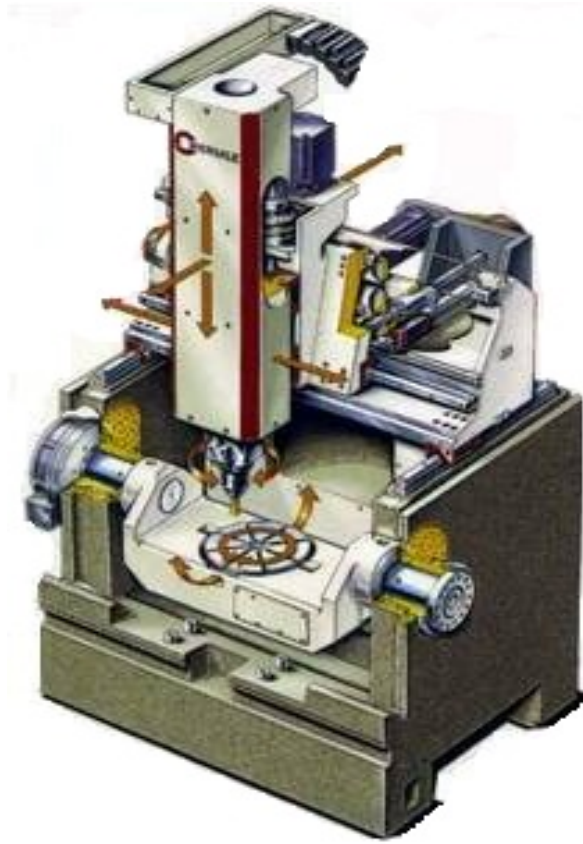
Hermle C600U 5-axis machine tool [97].
